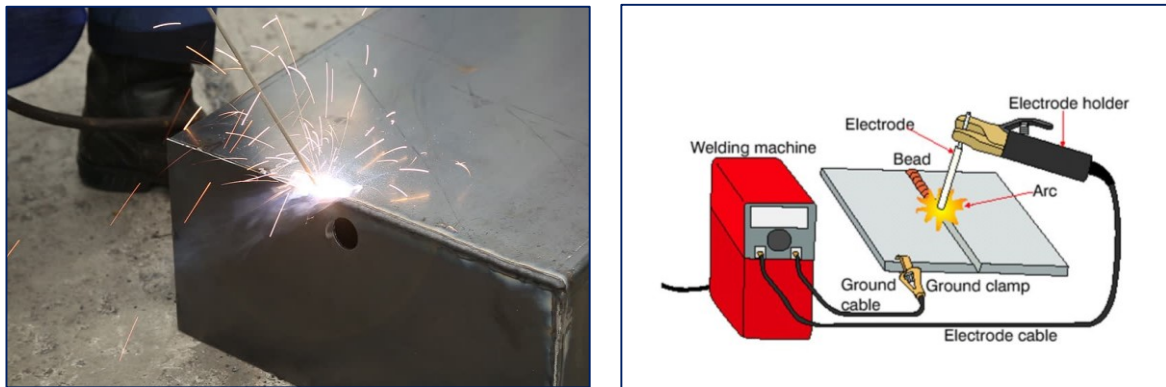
Manual Metal Arc Welding [13]
